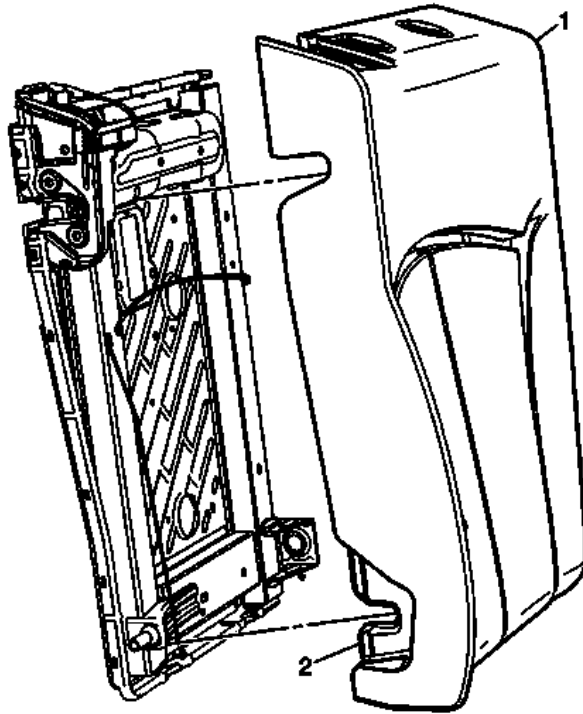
Rear Seat Back Cushion Cover And Pad (40% Side)
